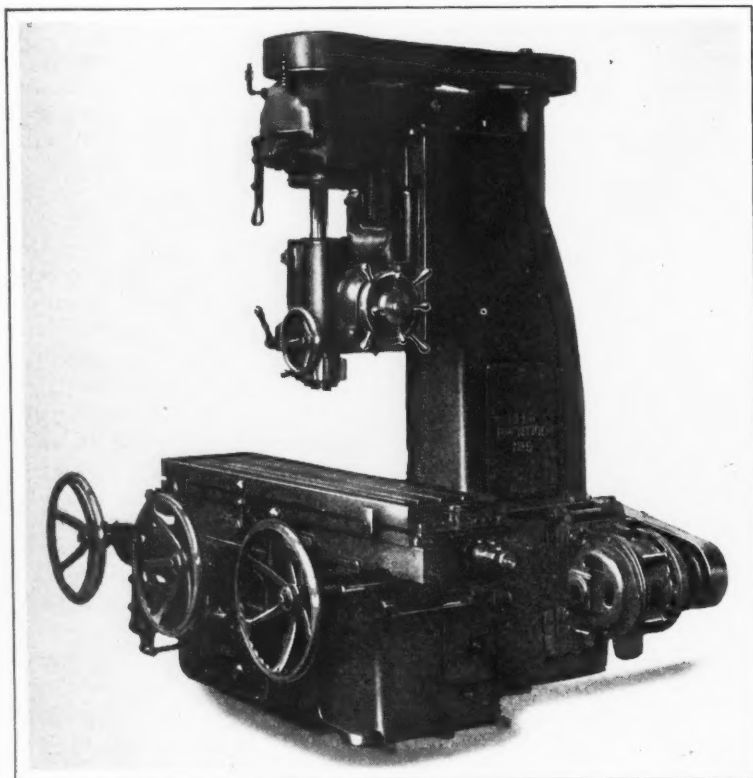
Reed-Prentice Jig Boring and Vertical Milling Machine
